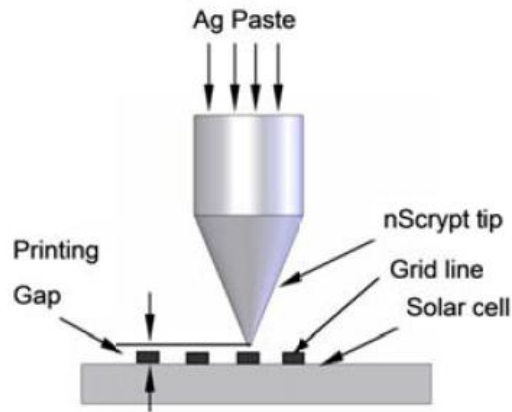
Schematic drawing of nScript SmartPump™ valve assembly [108].
